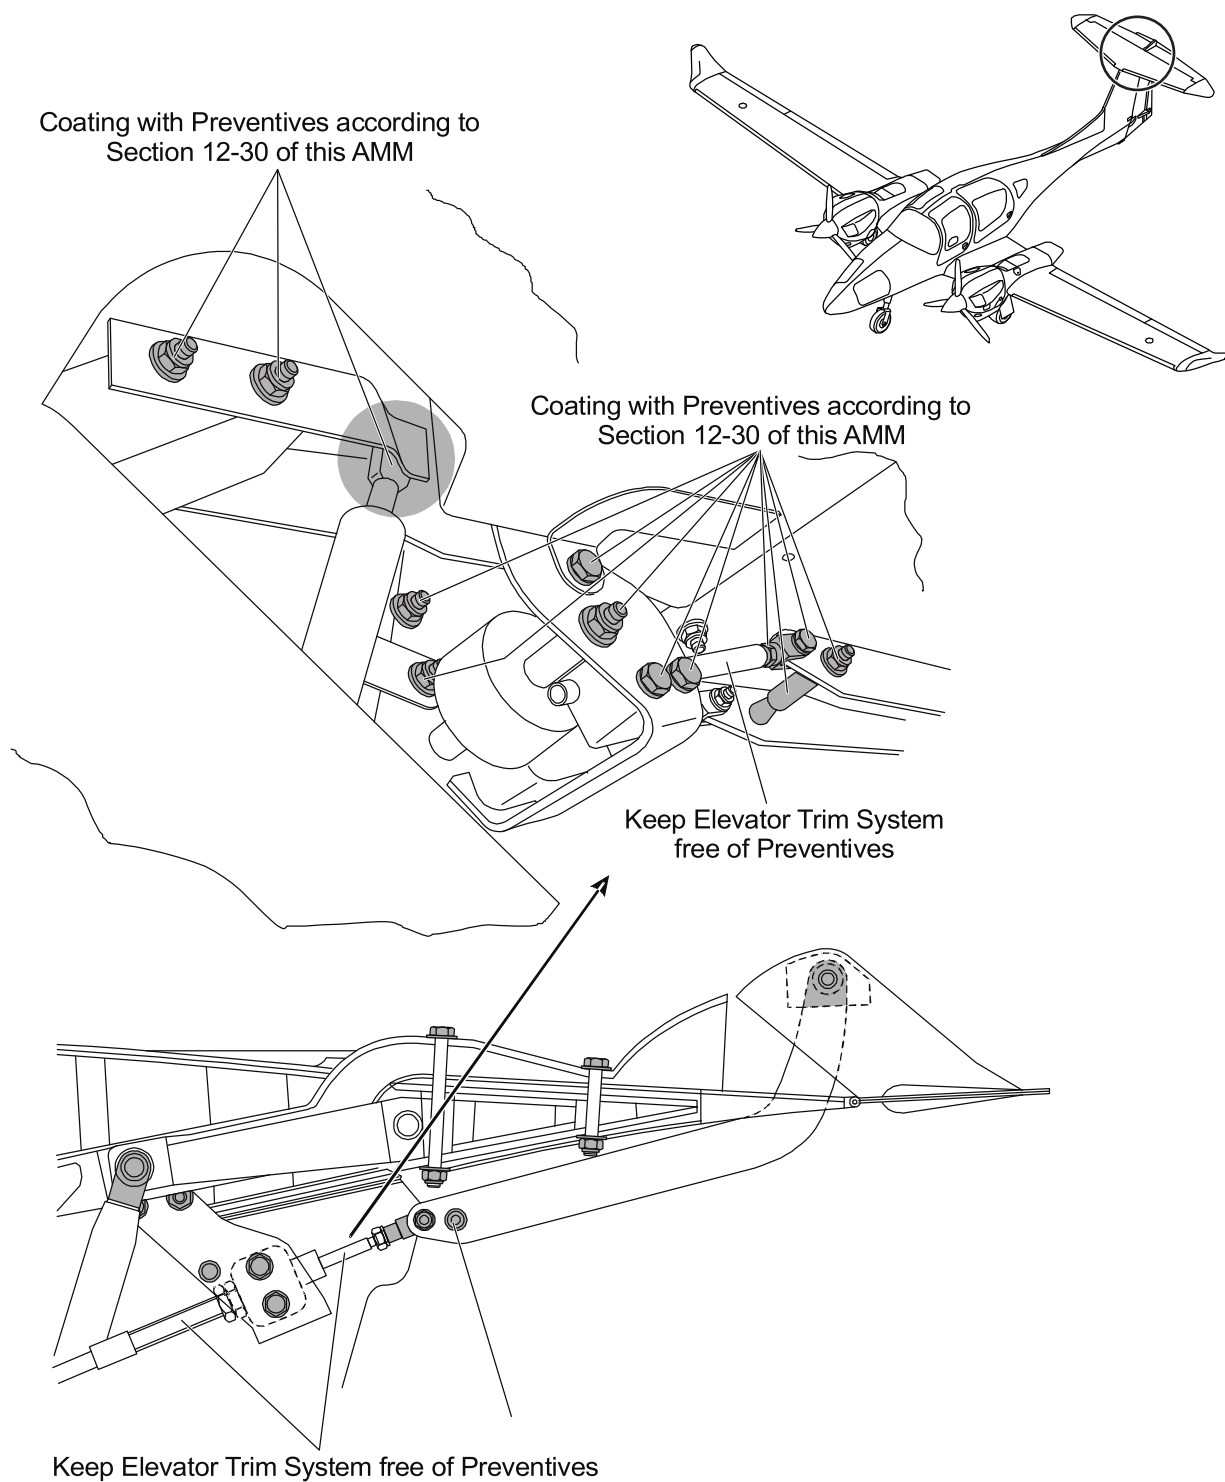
Anti-Corrosion Coating - Elevator and Elevator Trim System (1)
